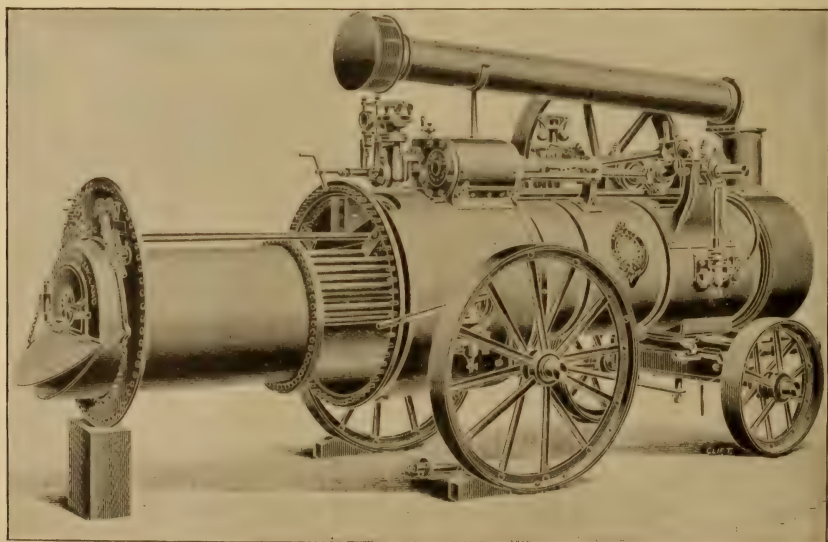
A PORTABLE ENGINE WITH REMOVABLE FIREBOX AND TUBES, BUILT BY MESSRS. ROBEY & CO., LTD., LINCOLN, ENGLAND.
